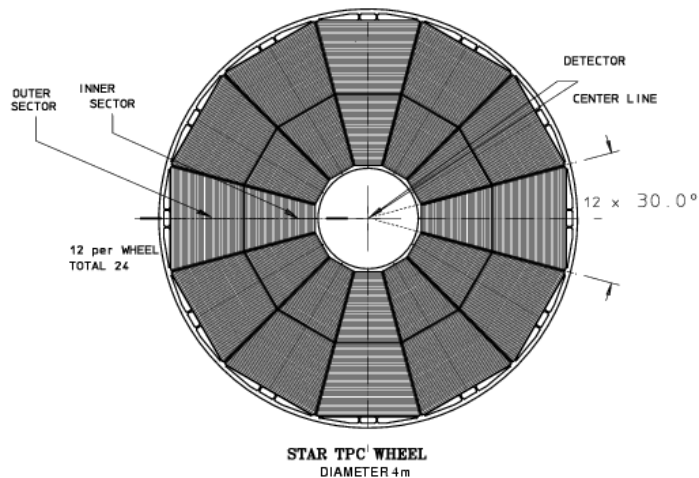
Beam's-eye view of a TPC end-cap, showing the sector layout
